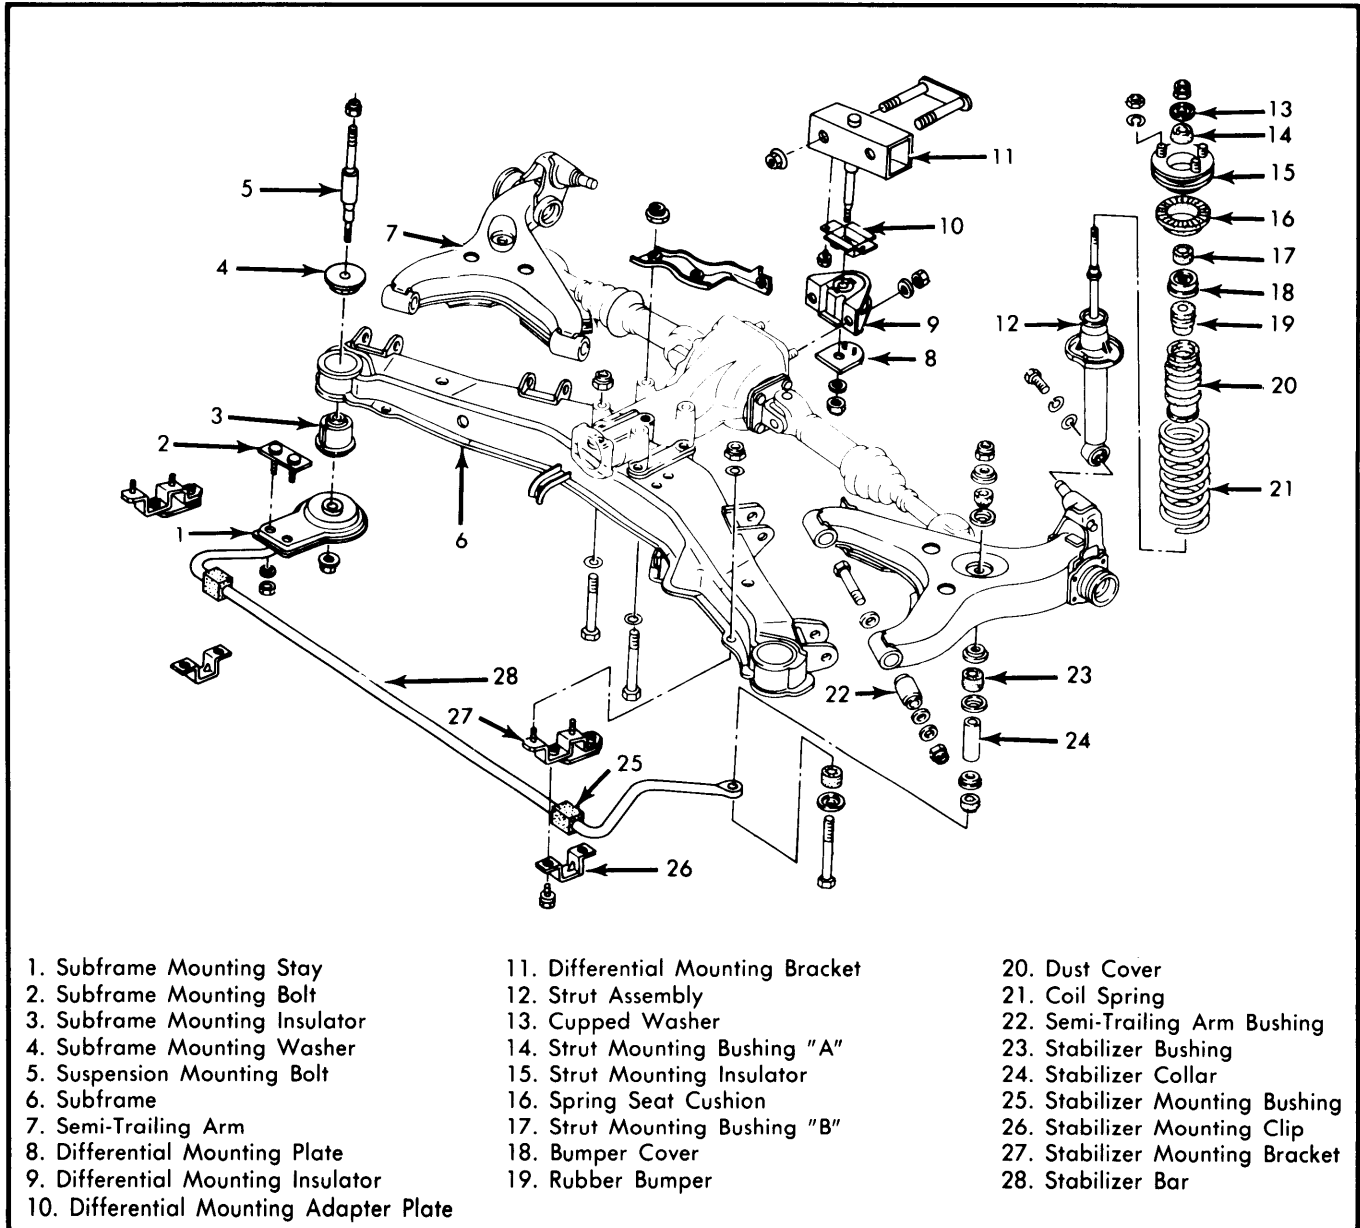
Exploded View of Datsun 280ZX & 810 Rear Suspension Assembly
